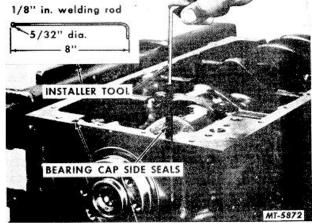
Installing Rear Main Bearing Cap Side Oil Seals
